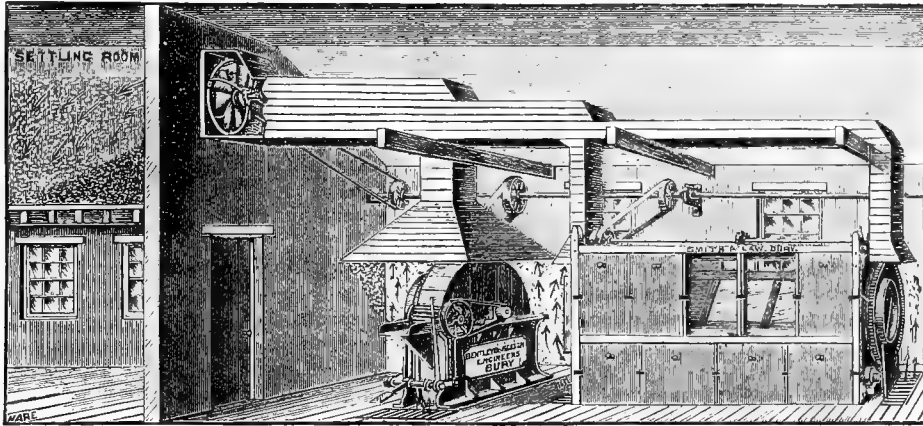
AIR PROPELLER REMOVING DUST FROM A RAG-CUTTING ROOM IN A PAPER MILL.
